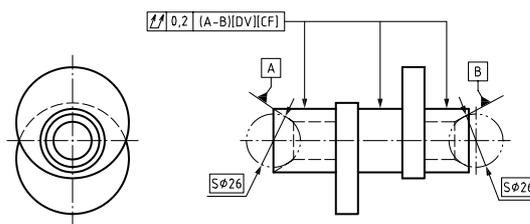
Example of datum system in which the datum target indication is omitted
